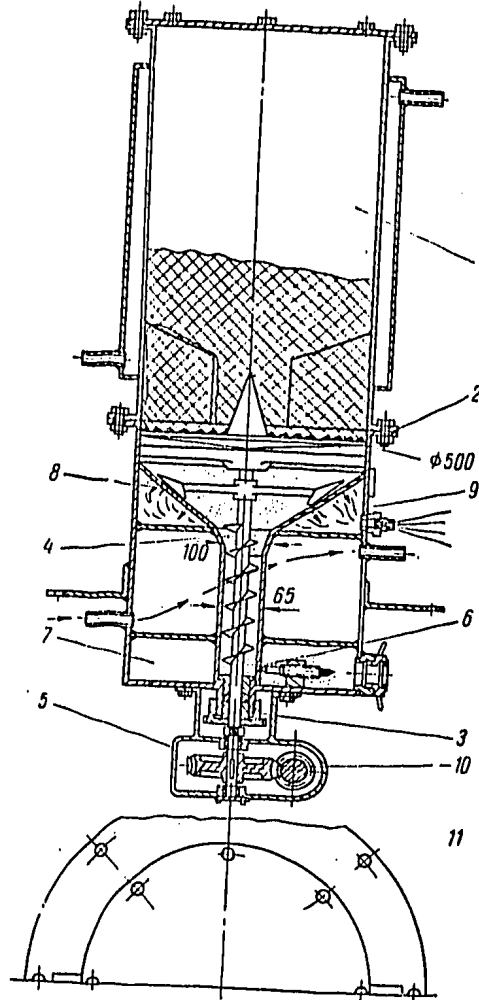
Equipment for the Recovery of Liquified Gas From Solidified Liquid Gas Fuel; (1) bunker for solidified gas, (2) flange connecting bunker with cutting appliance, (3) thrust bearing of shaft, (4) screw press, (5) reduction gear box, (6) outlet for solid residue, (7) space for solid residue, (8, 9) outflow of liquified gas, (10) reduction gear, (11) plan view
